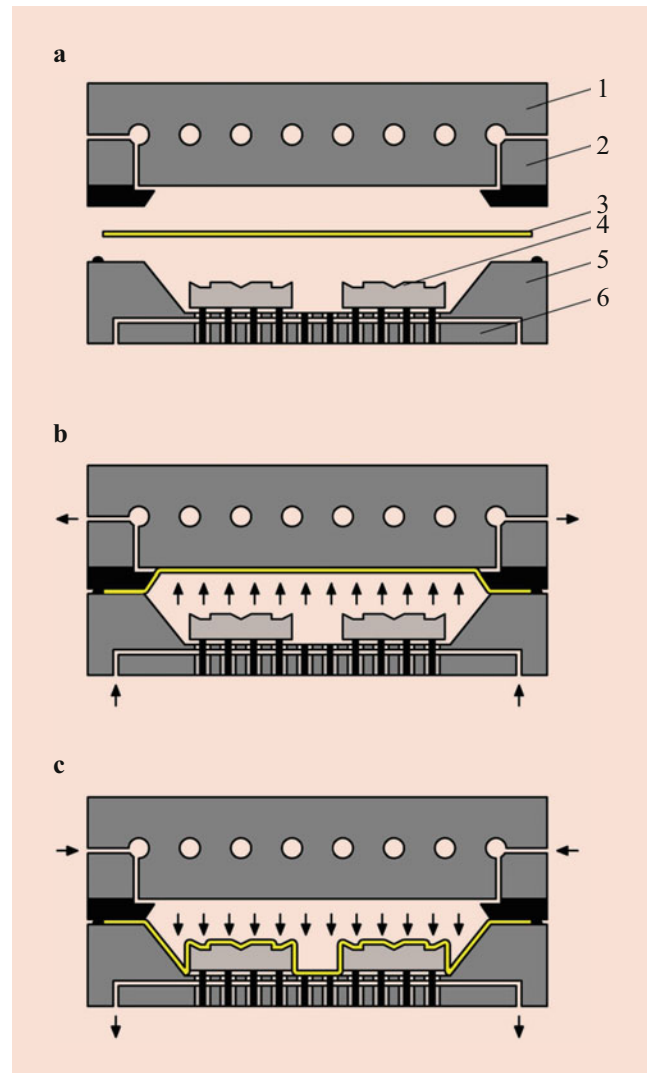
3D coating press without a membrane (Bürkle company) – (a) Open press (1 – heating plate, 2 – upper seal frame, 3 – coating foil, 4 – part to be coated, 5 – laying pallet, 6 – bottom piece); (b) Coating foil is pressed with compressed air from below against the heating plate and heated; and (c) The warm foil is pulled over the parts by vacuum from below and pressed on with compressed air from above [566]
